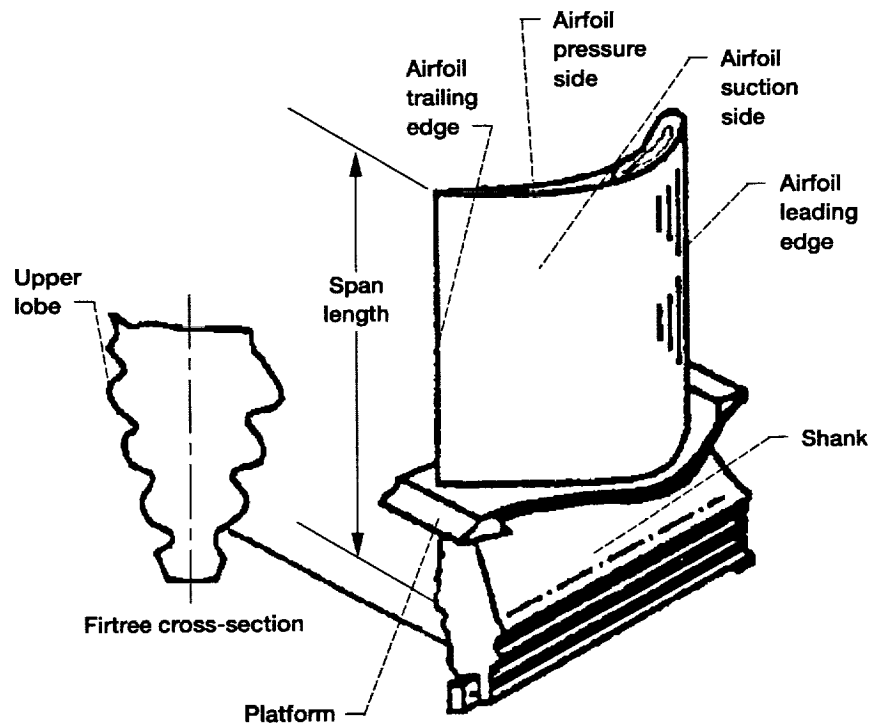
First stage turbine blade of high pressure fuel turbopump (HPFTP).
